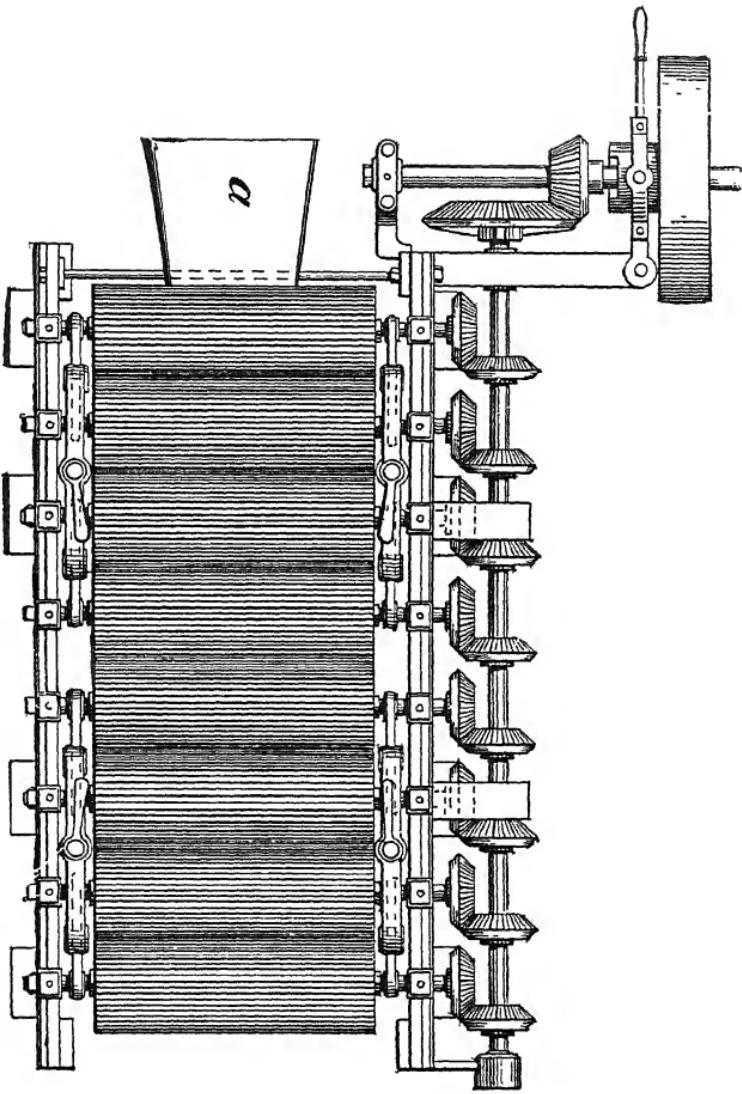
HEMP BREAKING MACHINE. Showing style of gearing *a* Feed table
